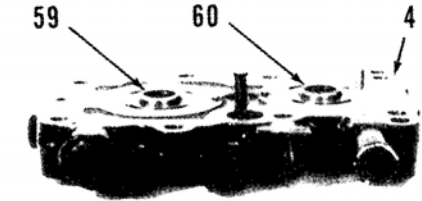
Install pump side needle bearing (59) and motor side needle bearing (60) with marked side protruding 35 mm (9/64 inch) above port block (4) machined surface.
